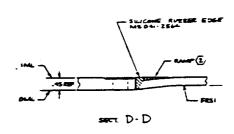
SPECIMEN PATTERN LAYOUT SKETCHES
